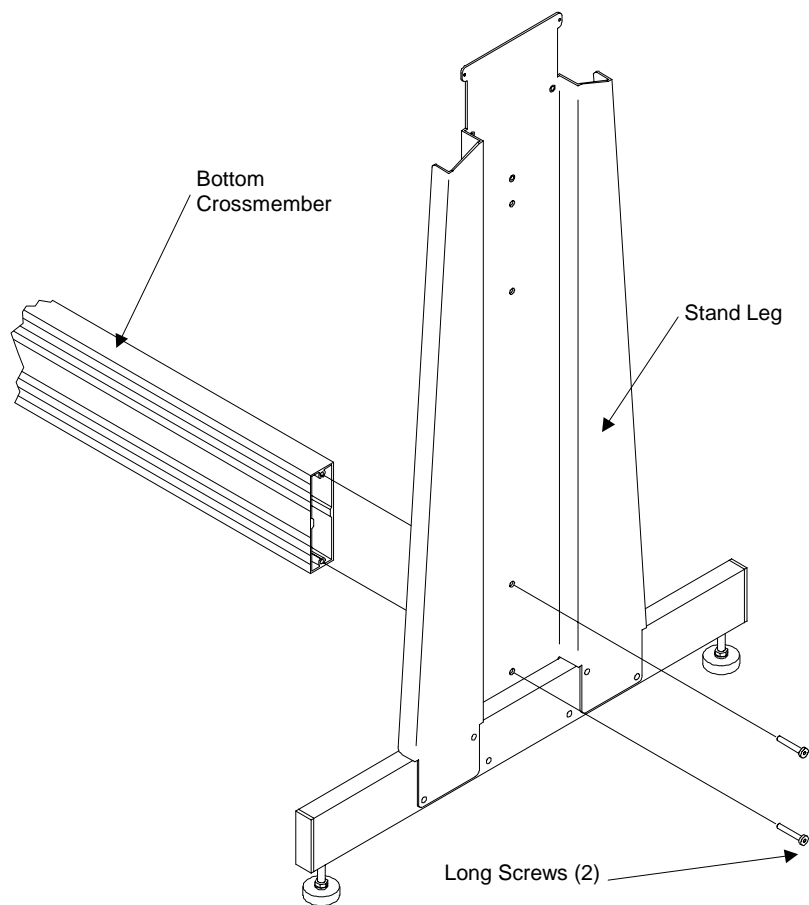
Attaching the Bottom Crossmember to a Stand Leg
